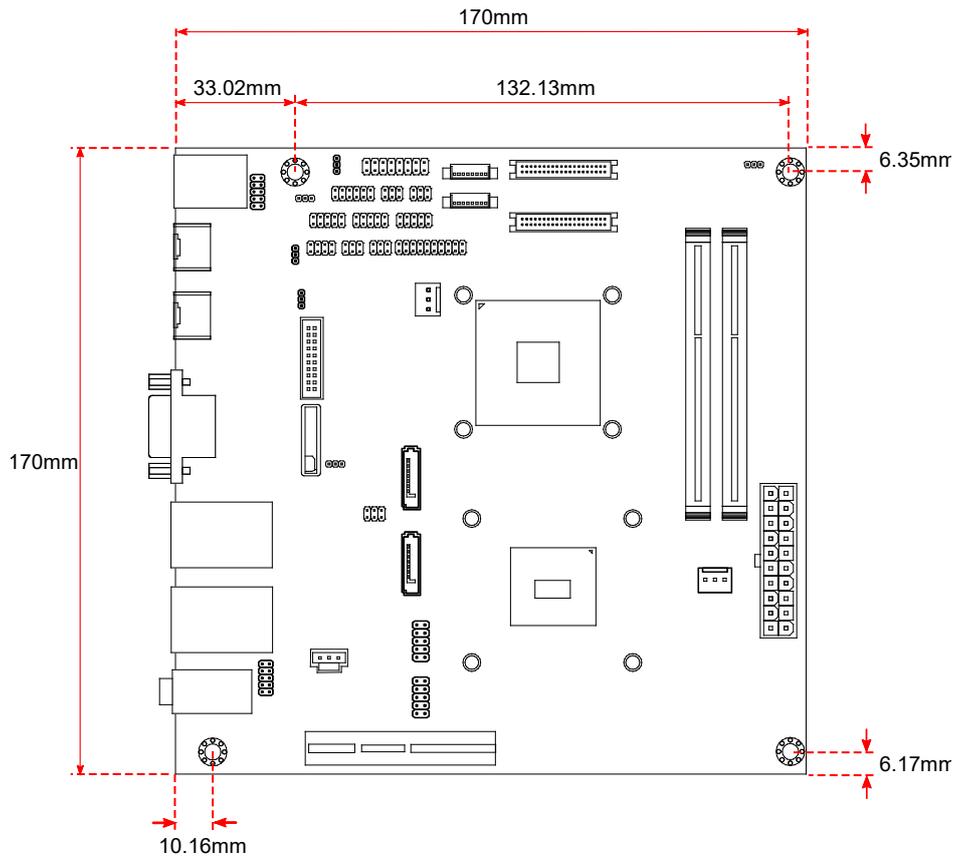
Mounting holes and dimensions of the VIA EPIA-M920
